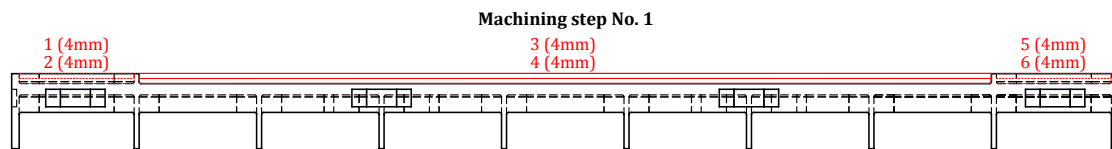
The discretization of the first machining step: six material removals with a depth of cut of 4 mm are used to numerically machine these machining features
